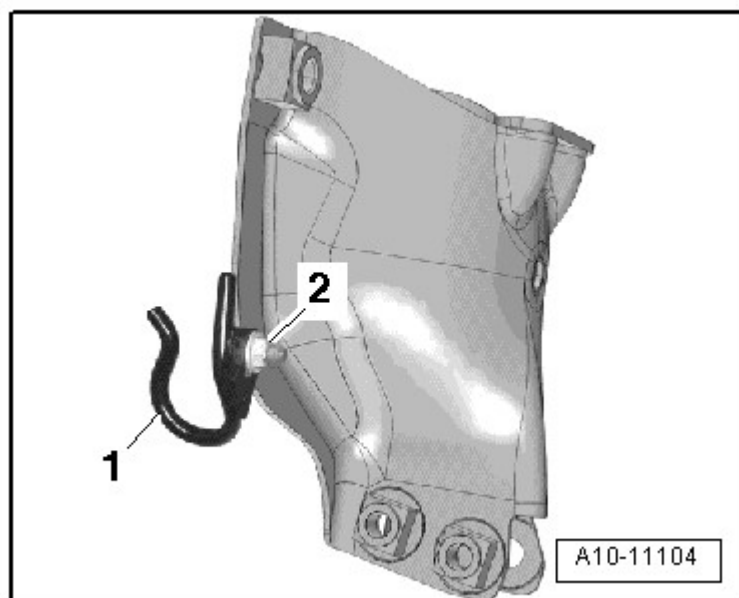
Identifying Power Steering Fluid Hose Bracket For Vehicles With Hydraulic Power Steering - Tightening Specification
